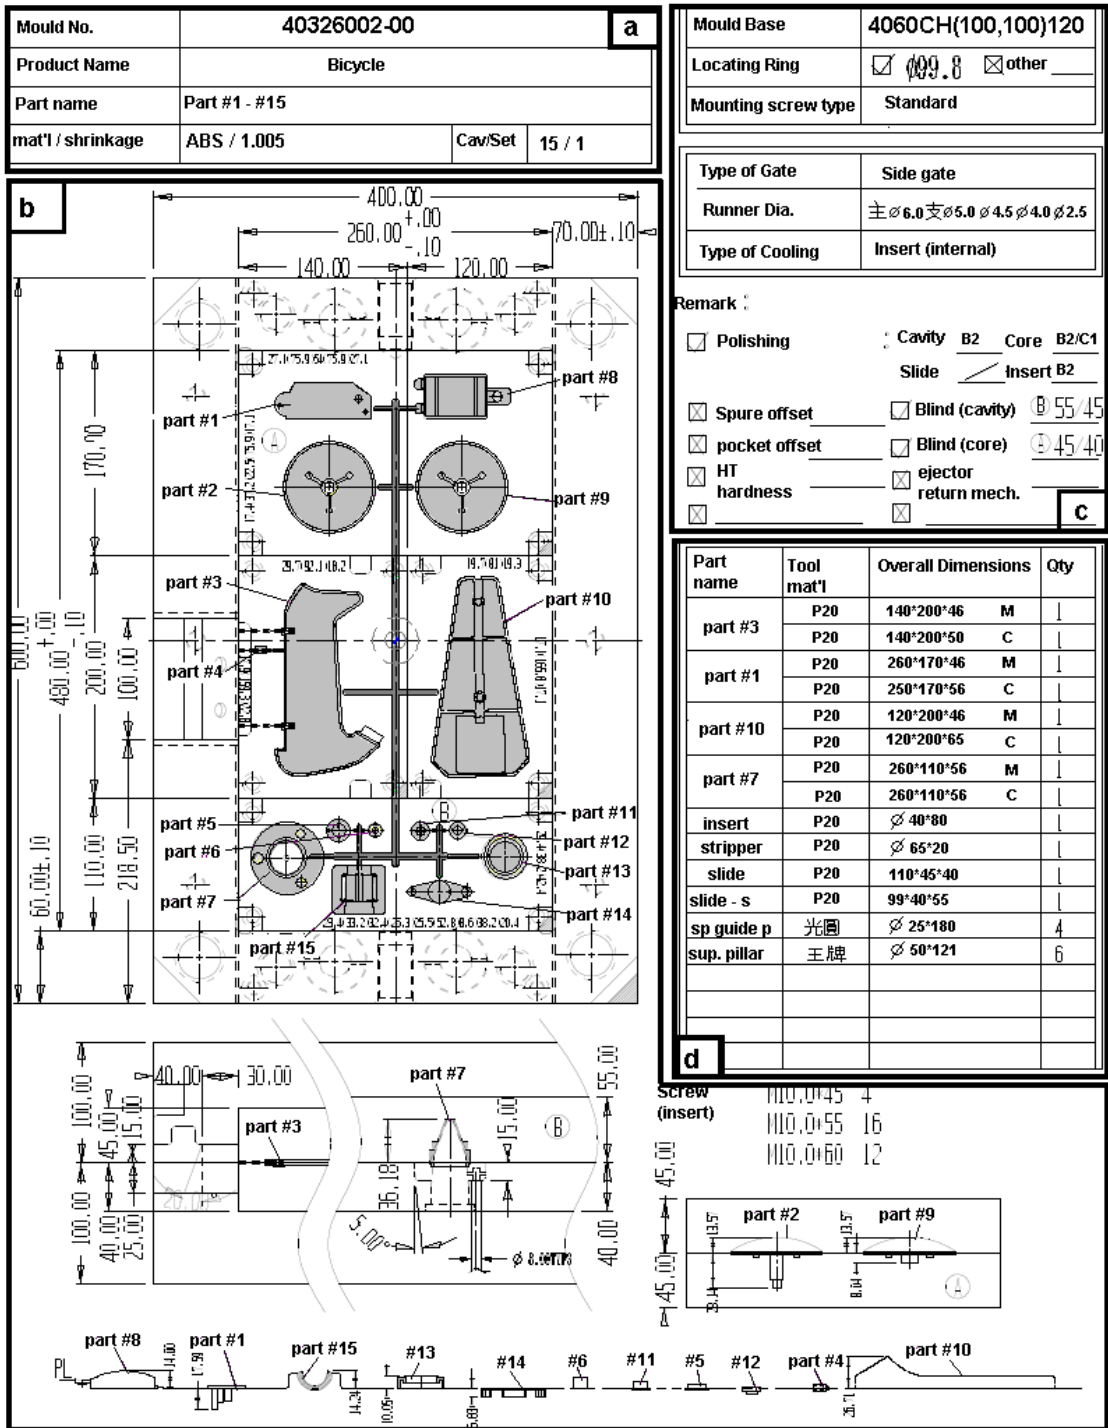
Real-life example of a mould layout drawing (Courtesy: the supporting company)
